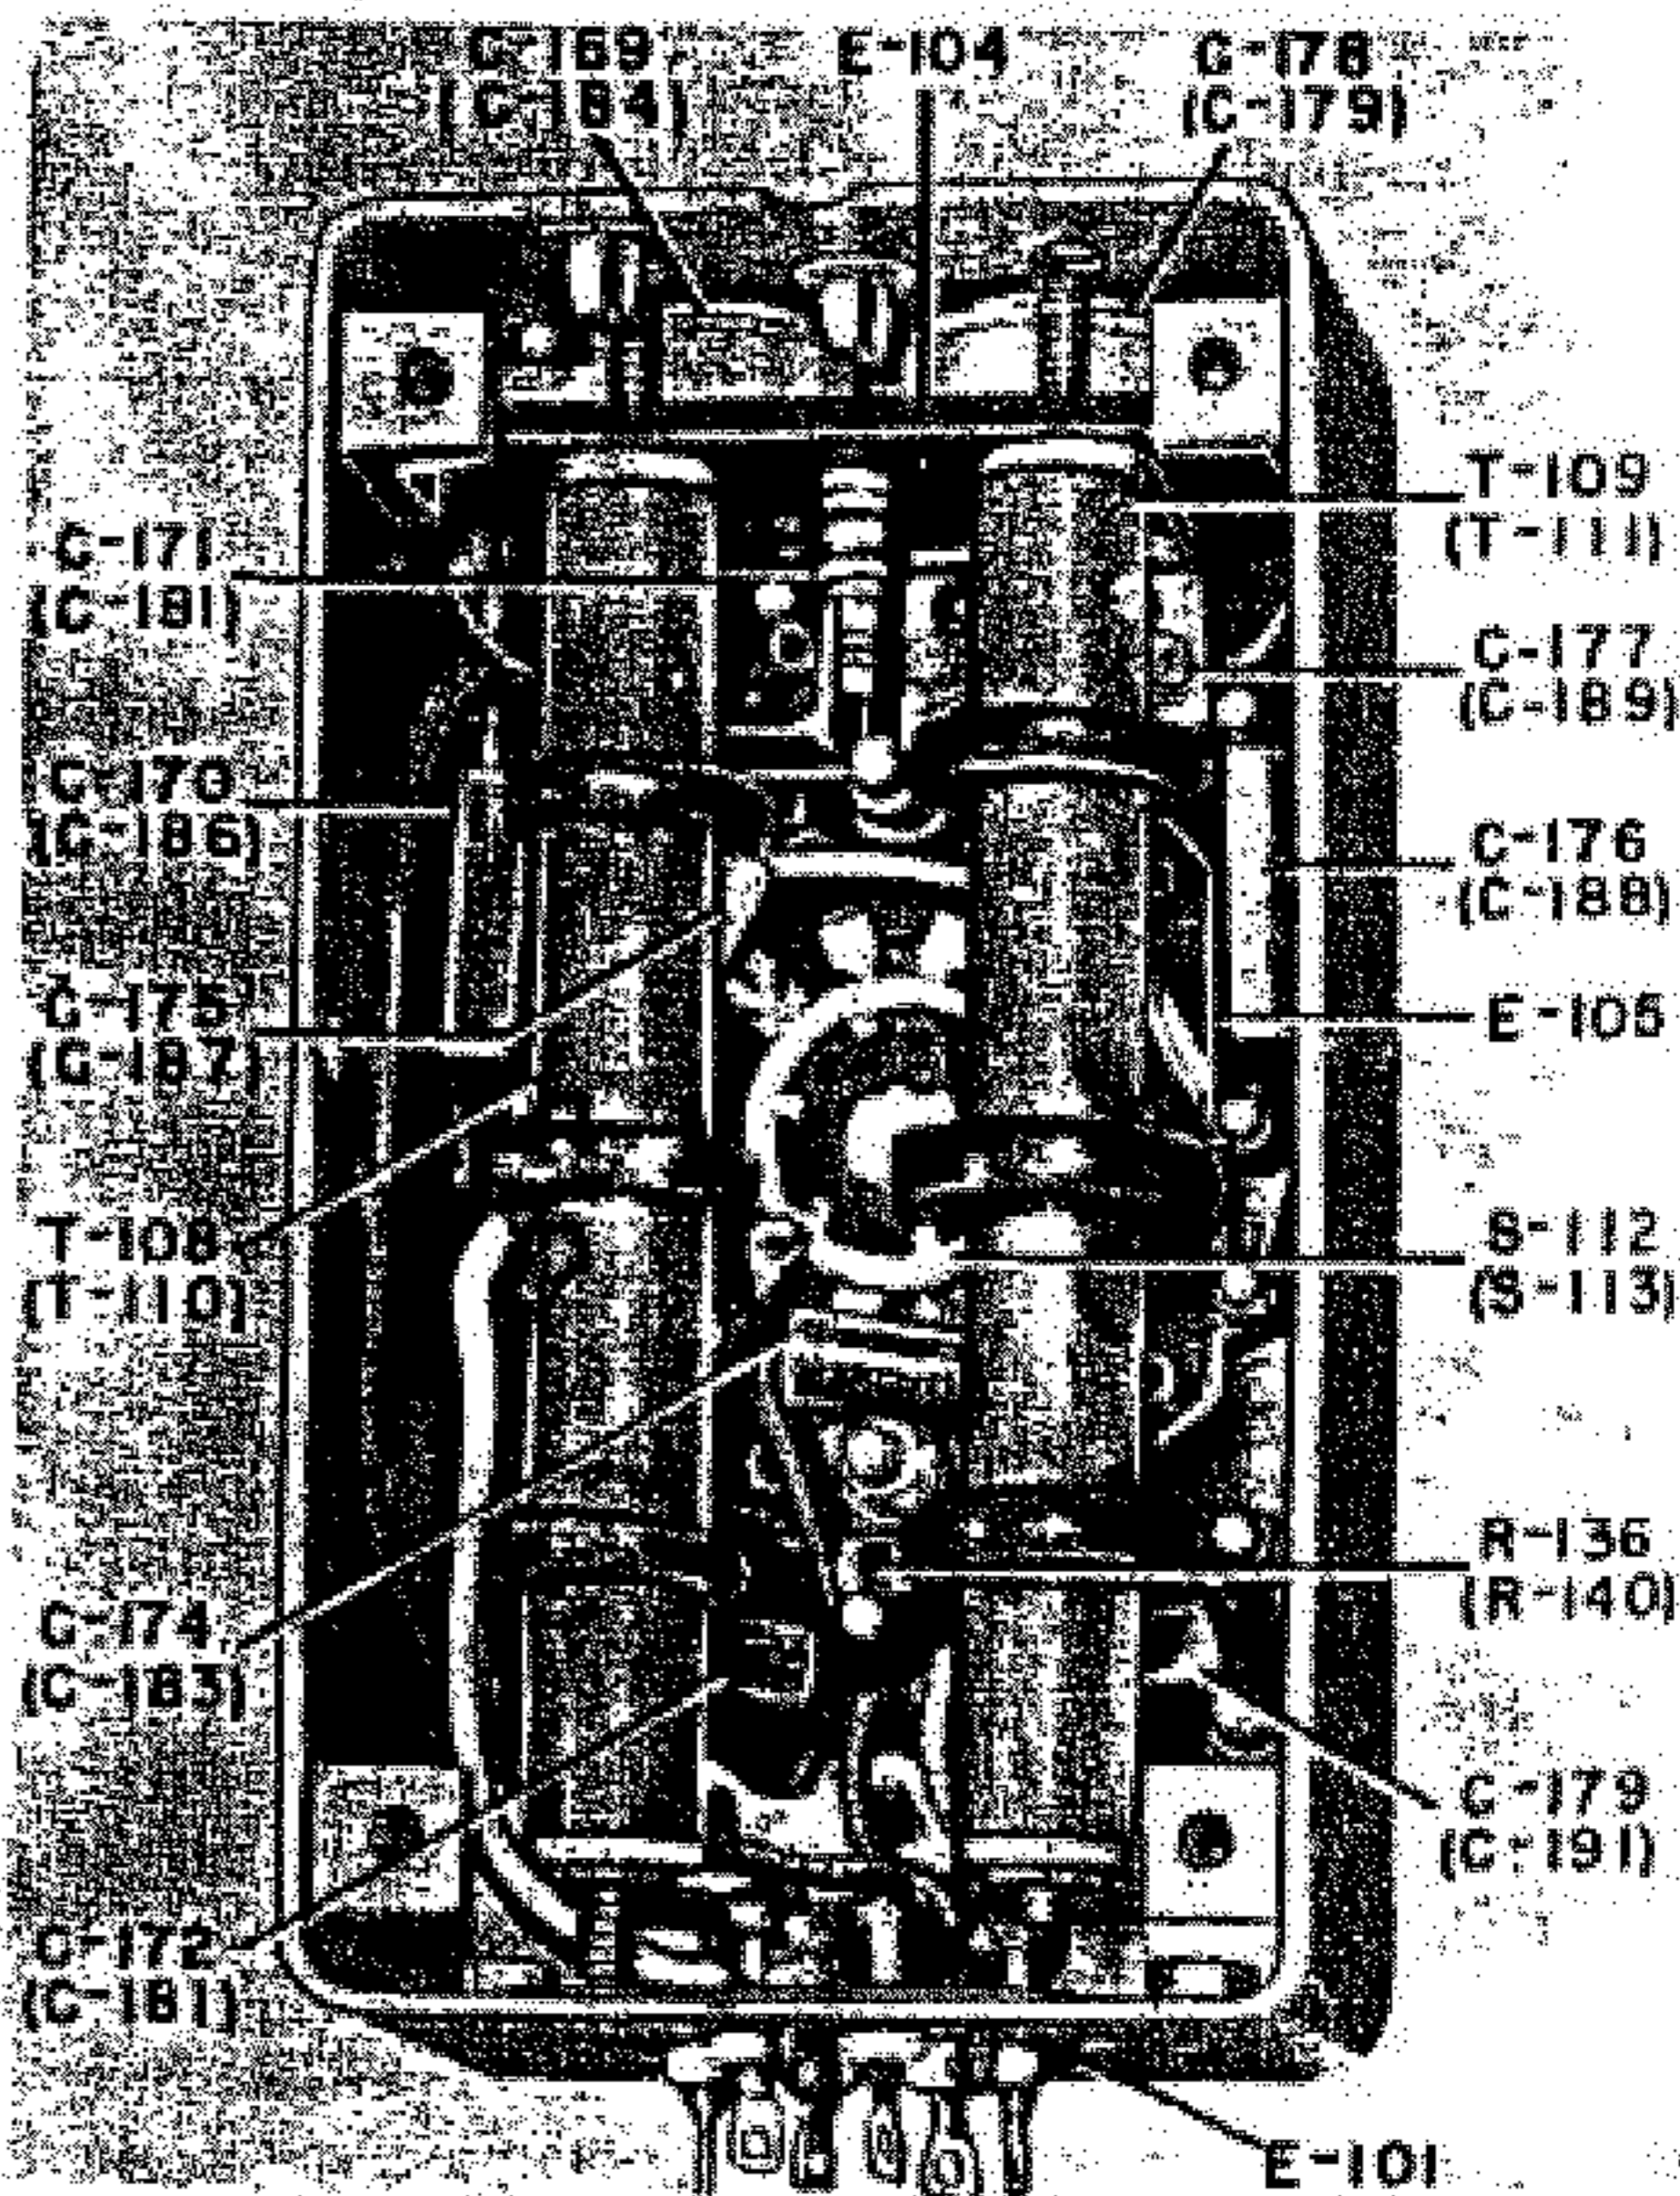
First or Second IF Transformer Assembly T-101 or T-102, Cover Removed
